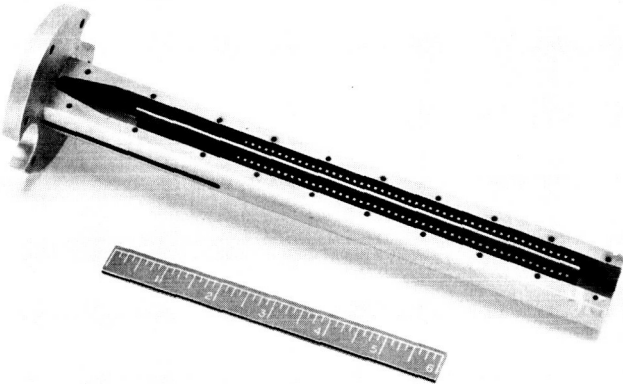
One-piece copper maser comb structure fabricated with improved process
